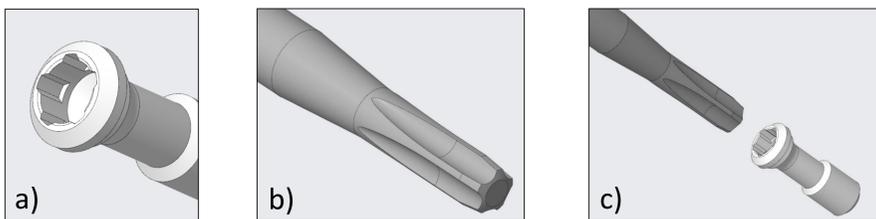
(a) New socket design for abutment screw; (b) Screwdriver; (c) System assembly
